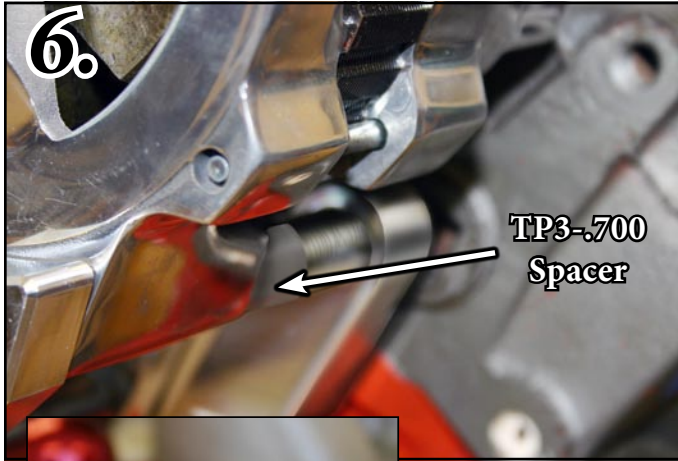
Using one $\frac{3}{8} \times 4\frac{3}{4}$ " SHCS (S277) through the Main Bracket, install the Alternator (P572), Put a .700 spacer (TP3-.700) behind the alternator mounting ear and adjust the Adjustment Spacer (S450) so its tight to the back of the alternator. In the upper slot use a MM100 Bushing and a M8 x 1.25 x 35mm SHCS (S553).
